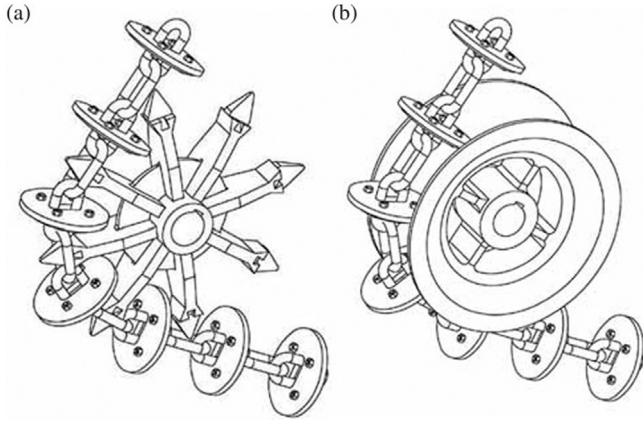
Sprocket (a) and rim wheel (b) for redirection of a tube chain conveyor [126].
